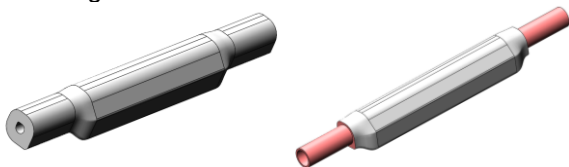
3D image of the pipe after AM print and support removal (left); after interface machining (right)
